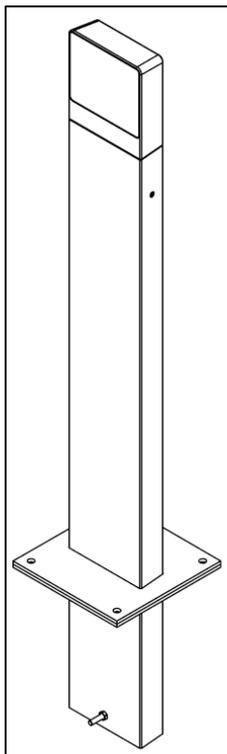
Ren 160 Flange Plate & Bolt on Root
